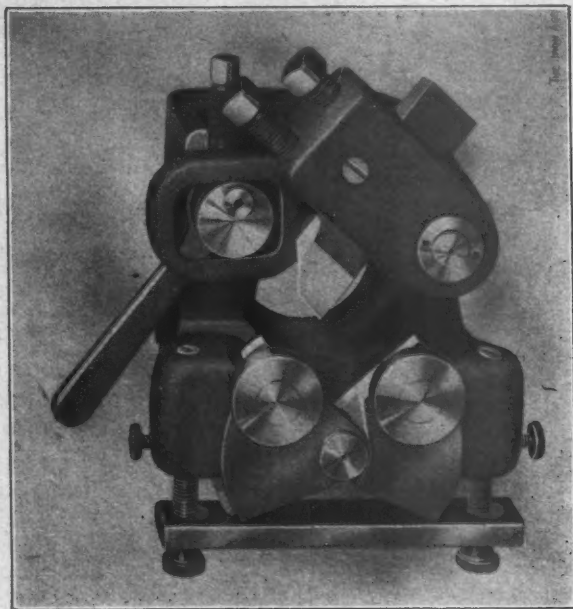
UNIVERSAL TURNER WITH ROLLER BACK REST.
